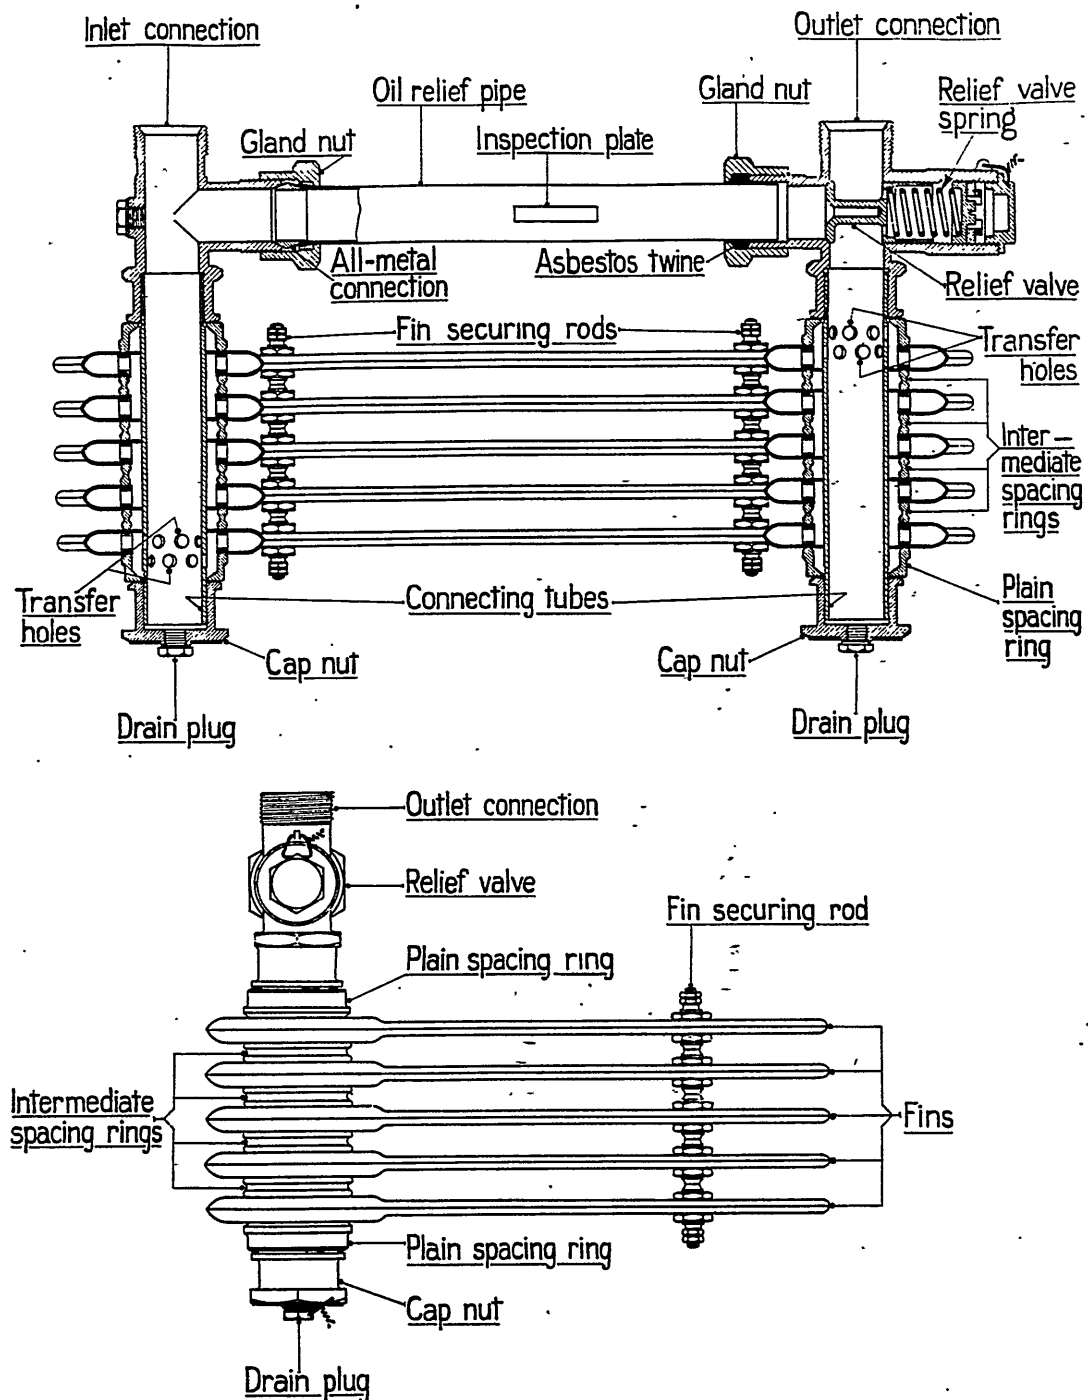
U-type oil cooler fin assembly for U.B.S. type
